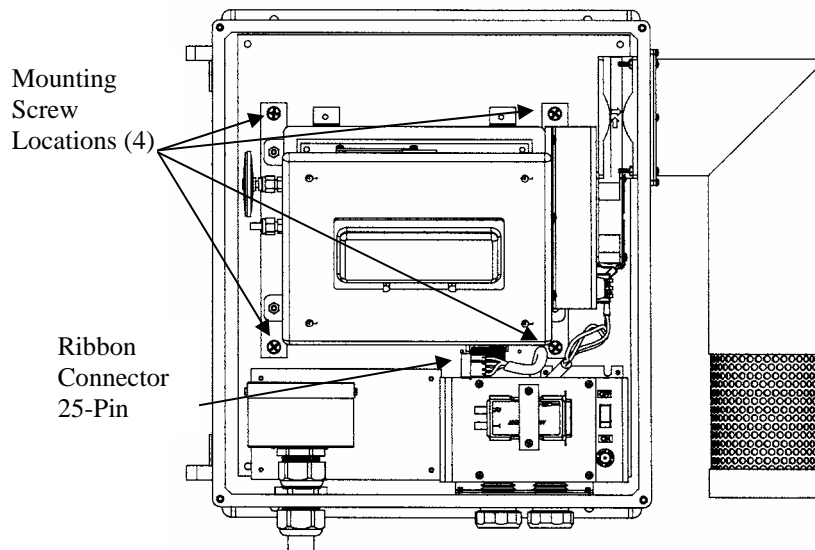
CW Sentry™ Mounting Screw and Ribbon Connector
